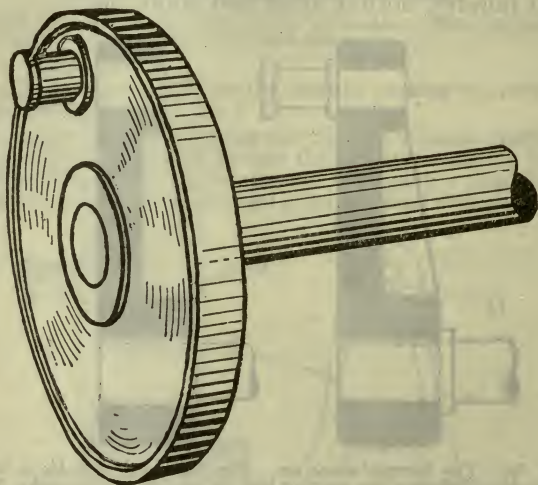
Built up crank shaft of the Rollins engine. The crank pin is carried by a disc which is counter-balanced. Hydraulic pressure is used to force the pin and shaft in place.
